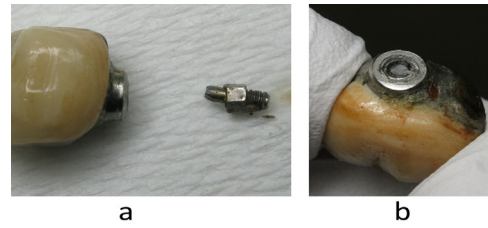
Abutment and screw fracture: a. common screw fracture pattern (junction of shank with head); b. fracture surface of abutment, and screw (screw head remained inside abutment)
